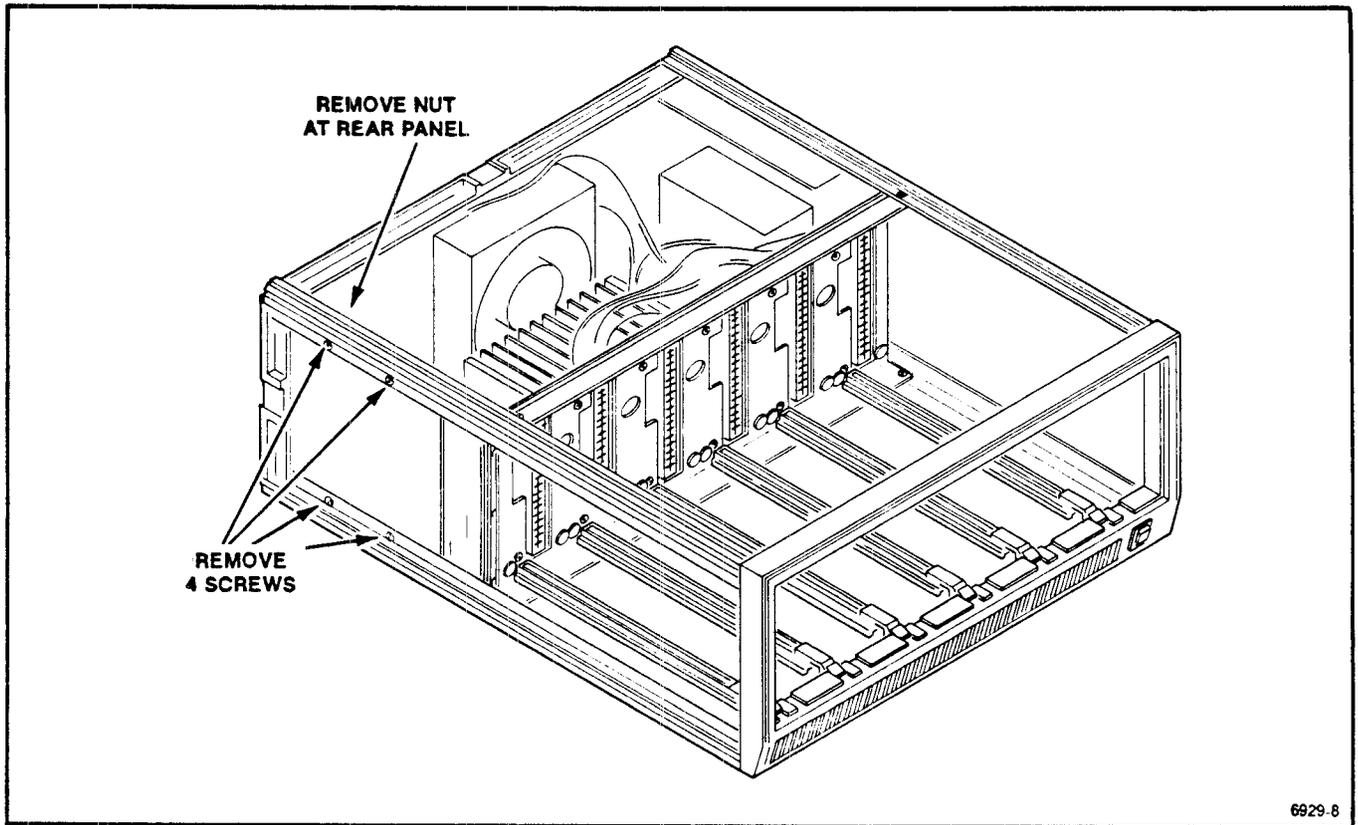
Location of screws holding the dc power supply circuit board to the mainframe chassis.
